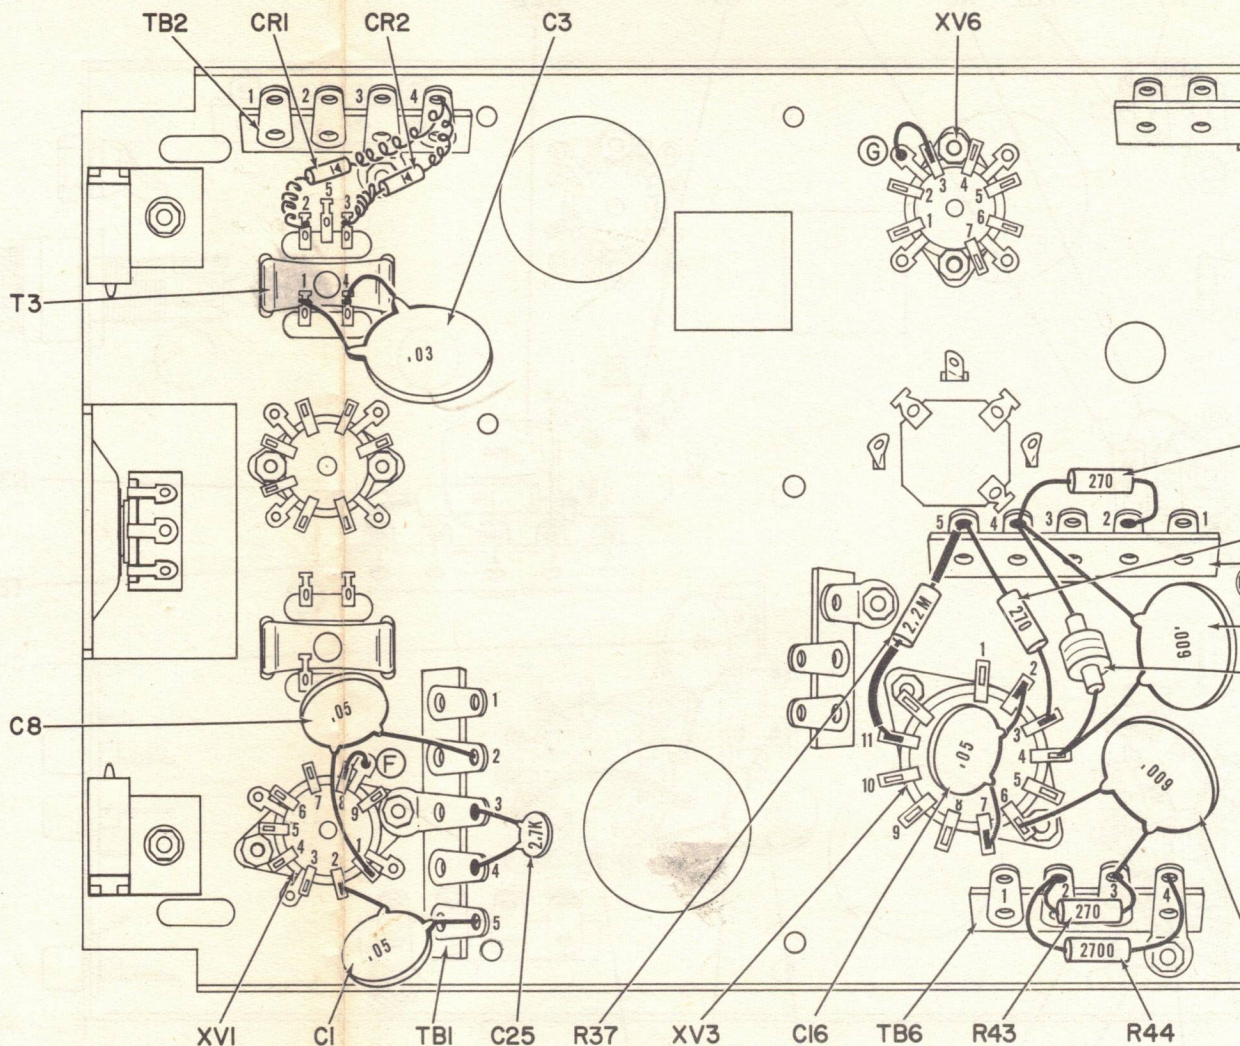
C. Bottom Chassis Wiring (Cont'd.)
